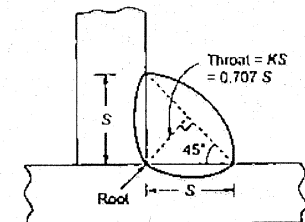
Typical cross-sectional dimensions of a fillet weld
